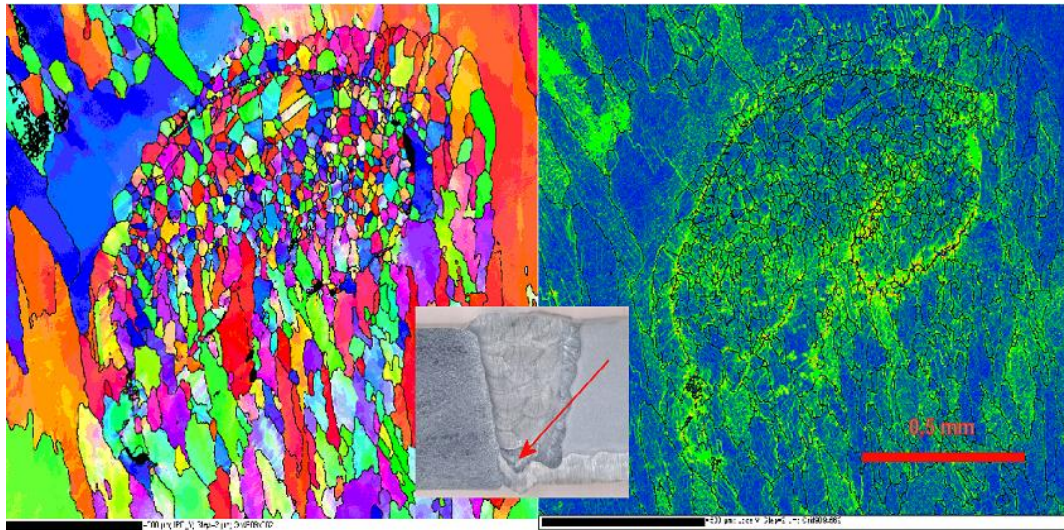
A weld defect in Alloy 82 weld metal of “Neste” mock-up DMW sample [1], where unmelted tip of the TIG filler metal wire is surrounded by the melted and solidified weld metal. On the left is an EBSD IPF map and on the right a local misorientation map. The location of the defect in the DMW is marked by an arrow.
